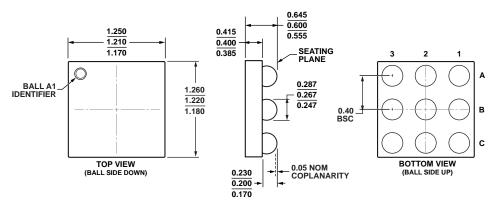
9-Ball Wafer Level Chip Scale Package [WLCSP] (CB-9-3) Dimensions shown in millimeters
